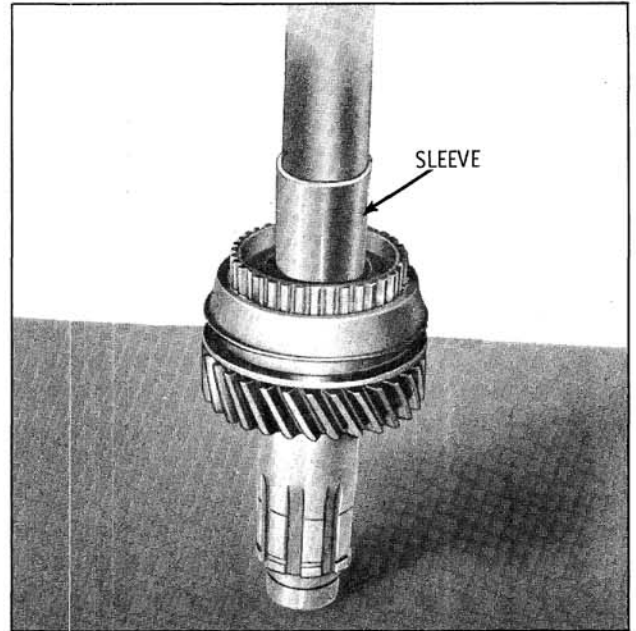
Removing 1-2 Speed Synchronizer Clutch Assembly Retaining Sleeve
